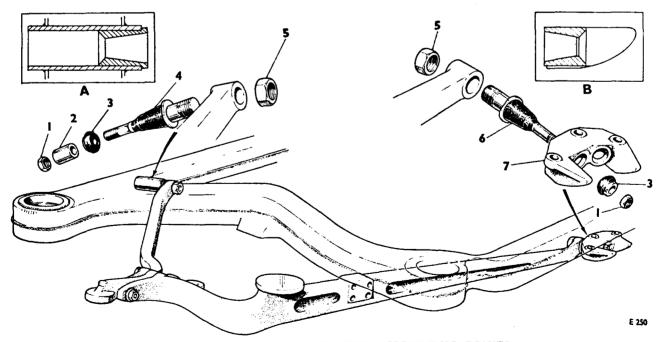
LOWER TRIANGLE LEVERS MOUNTING POINTS
